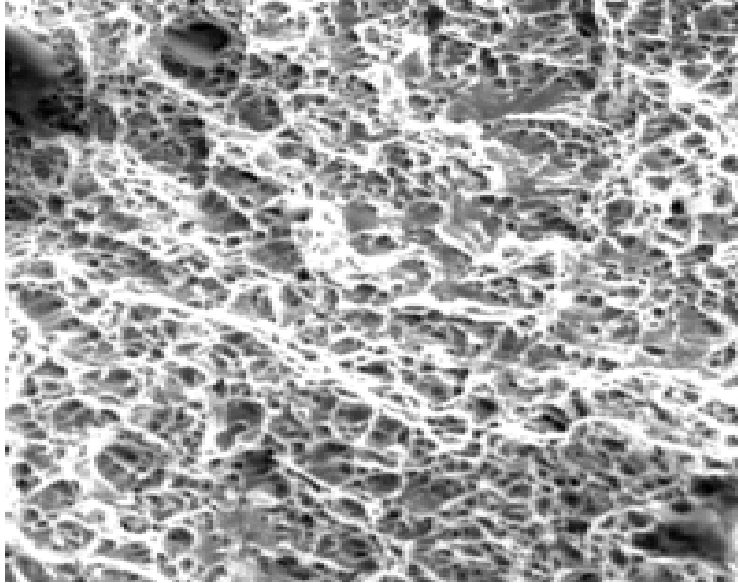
SEM measurement at x1000 magnification for specimen after breakage of tensile test which weld from by using welding flux (iv)
